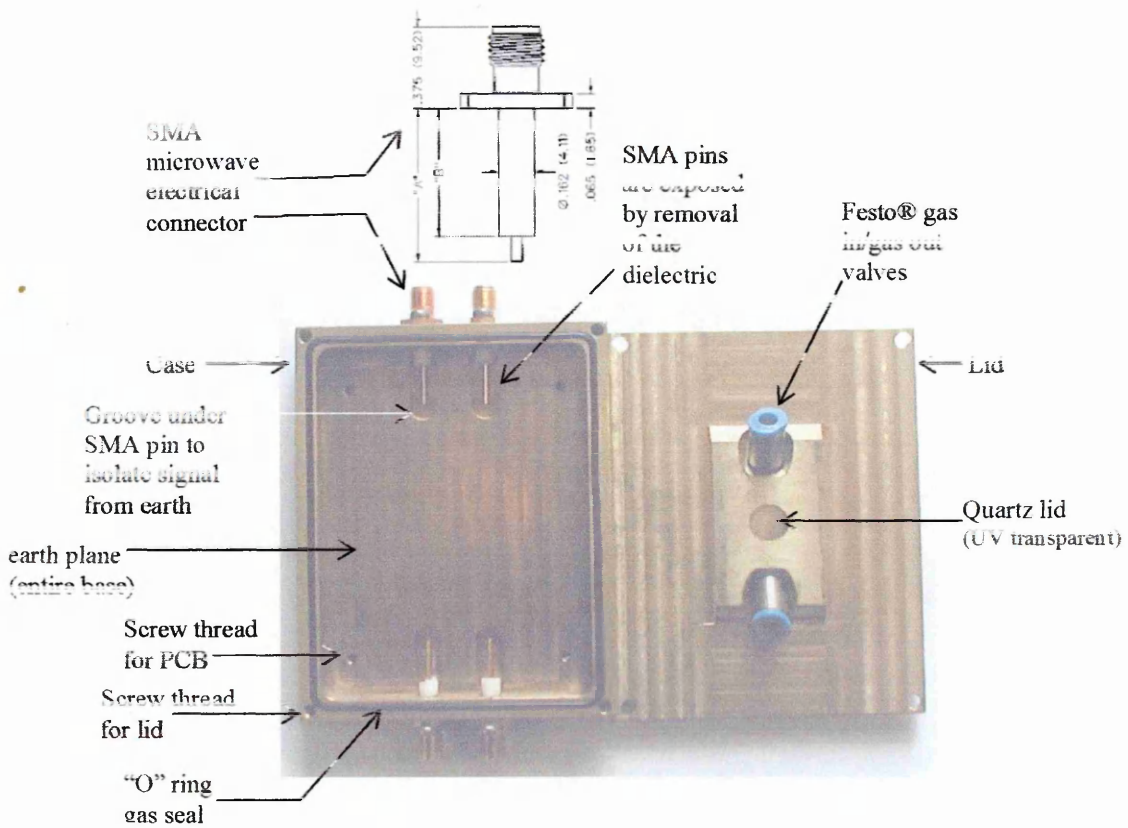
(B) Photograph of the completed FBAR Housing Assembly (FHA). The PCB is not inserted
